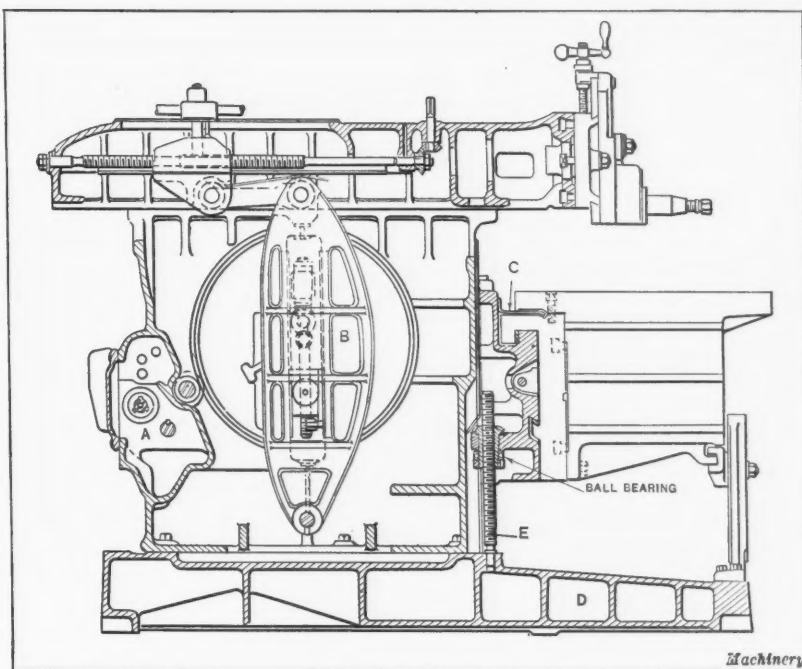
Cross-section of Shaper, showing the General Arrangement of the Machine
